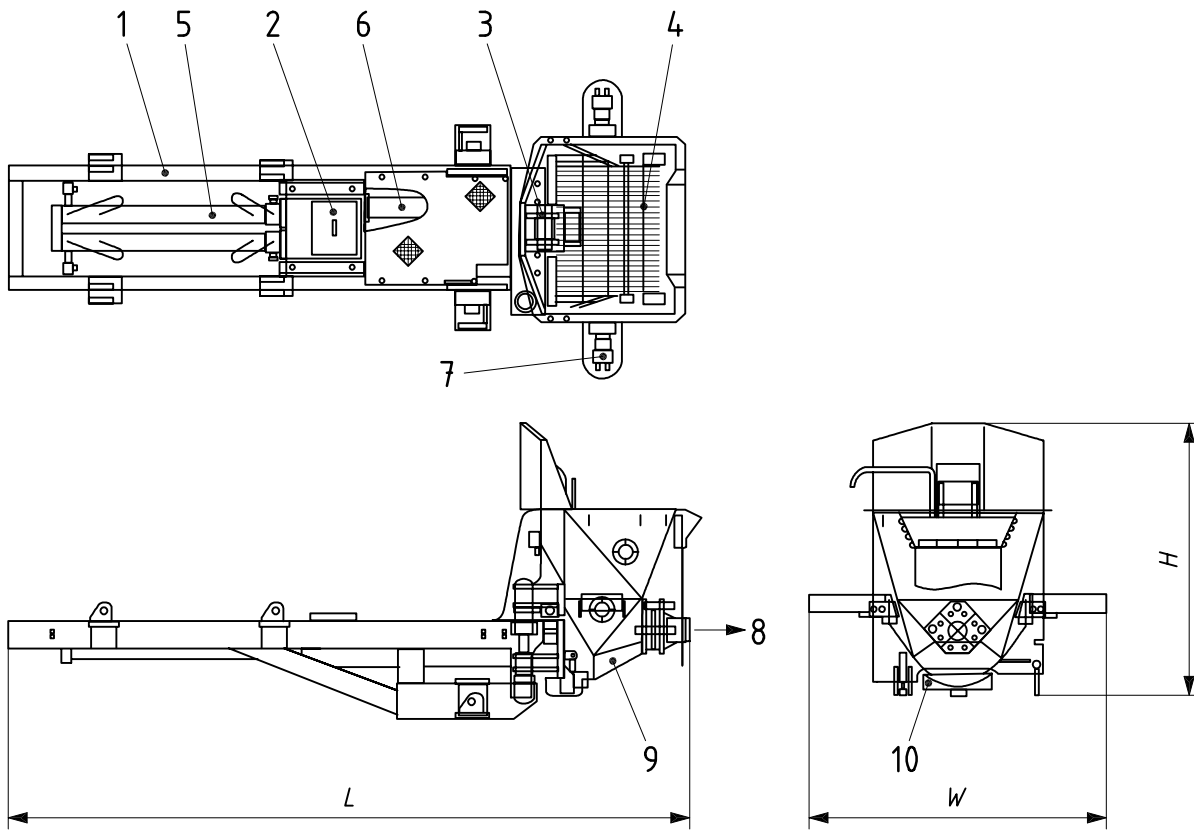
Wet mixture spraying process — Rotor type sprayer
